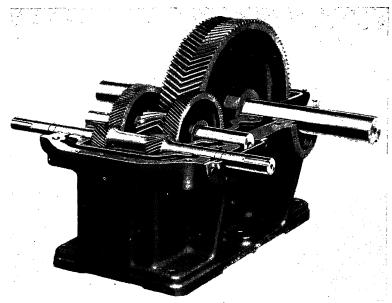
Geared speed reducer. Double-reduction parallel-shaft reducer with sleeve bearings. Power may also be taken off at the intermediate shaft. (Falk.)
